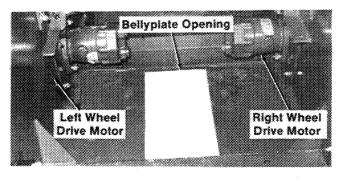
Hydraulic Motors in Chassis with Engine, Hydrostats, Gear Pump & Piping Removed
